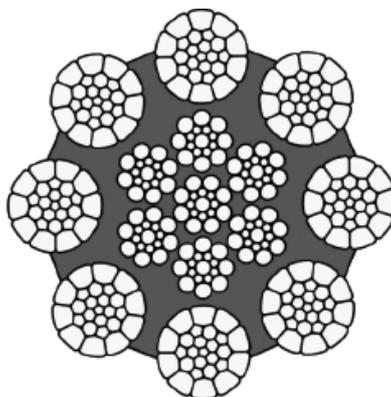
Typical round strand rope cross-section with compacted outer strands.
